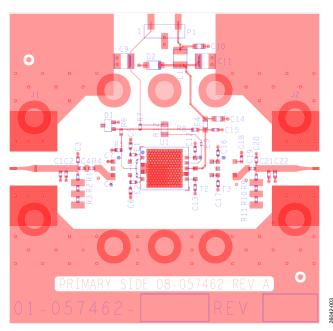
ADCA3270-EVALZ Assembly Drawing (Top Side)
